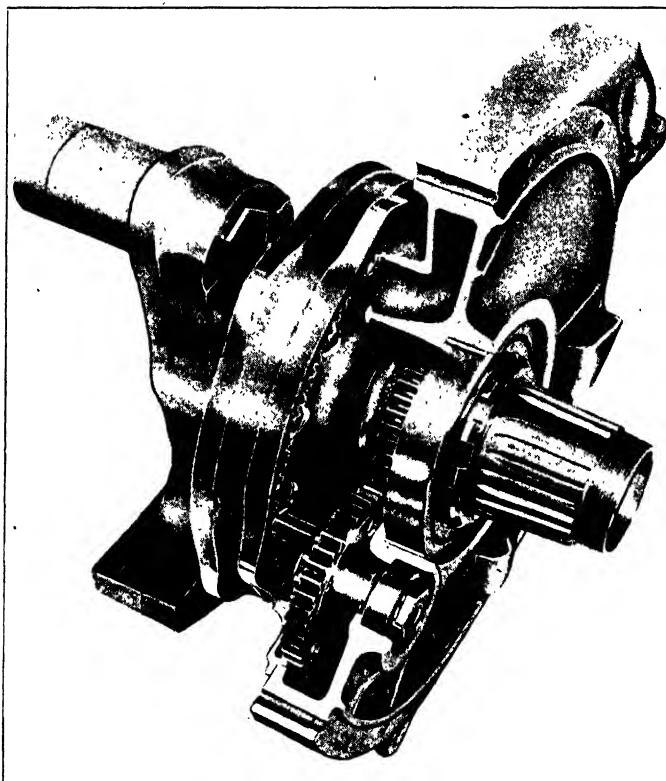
Cam Gear showing Method of Driving Cam Sleeve.
